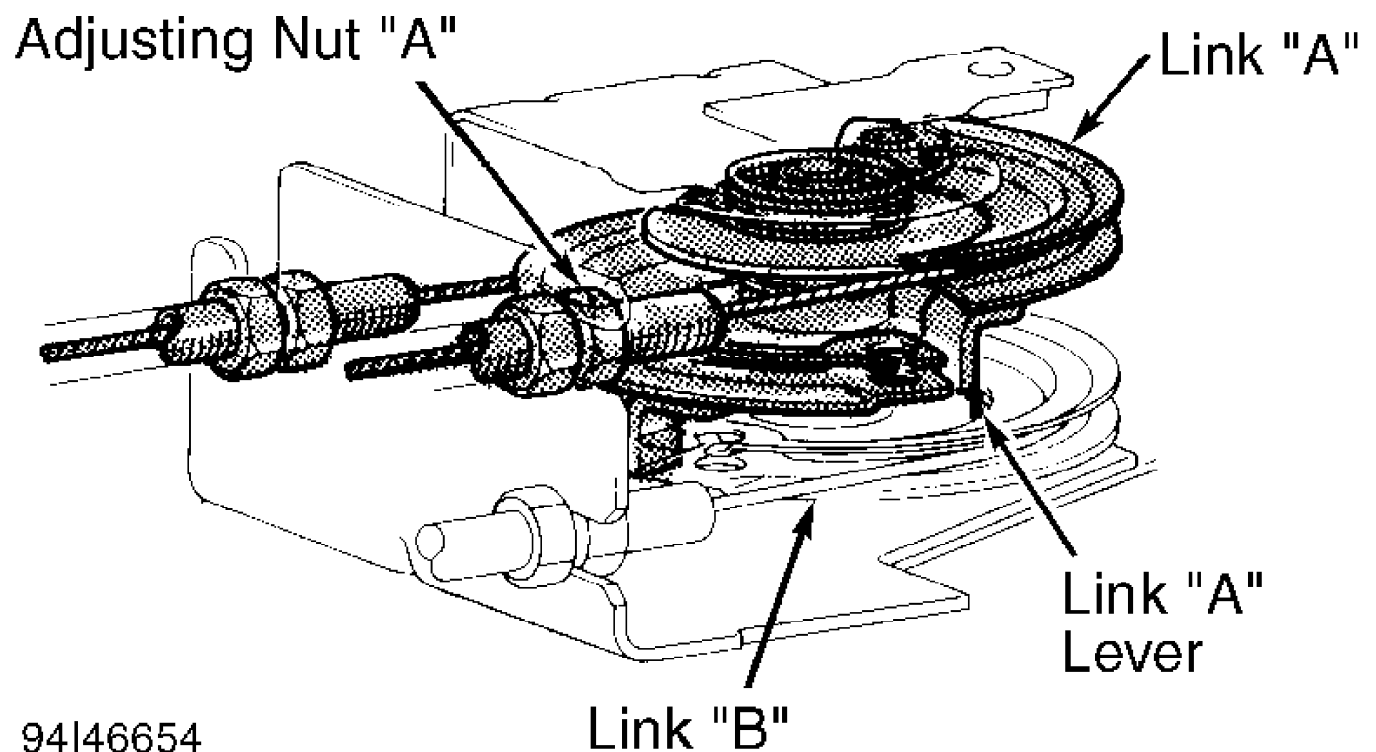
Adjusting Cruise Control Cable (Stealth, 3000GT)
